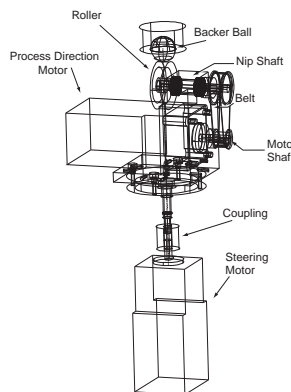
Process Direction Actuator and Steering Motor Mechanism
